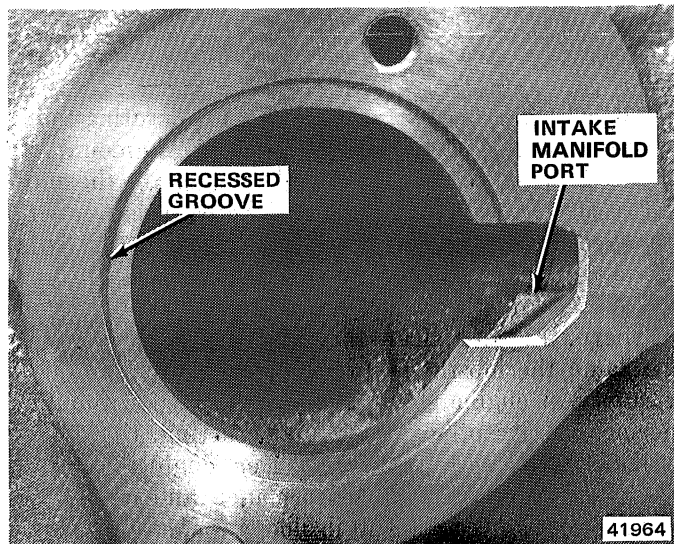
C-6 Thermostat Recess—Six-Cylinder Engine
